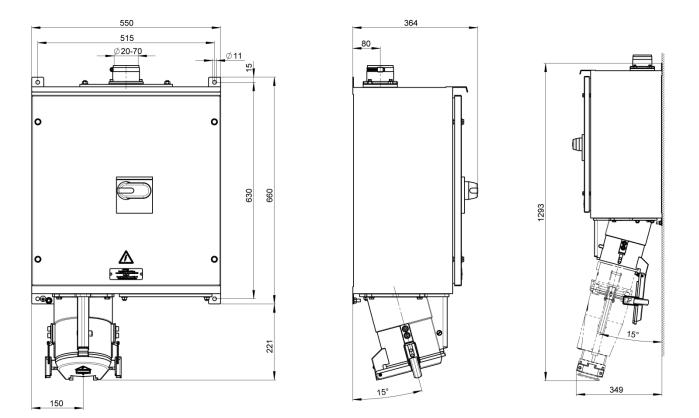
Dimensions, Connector Unit with Circuit Breaker CUCB B-Line (250 A – 400 A) in mm
